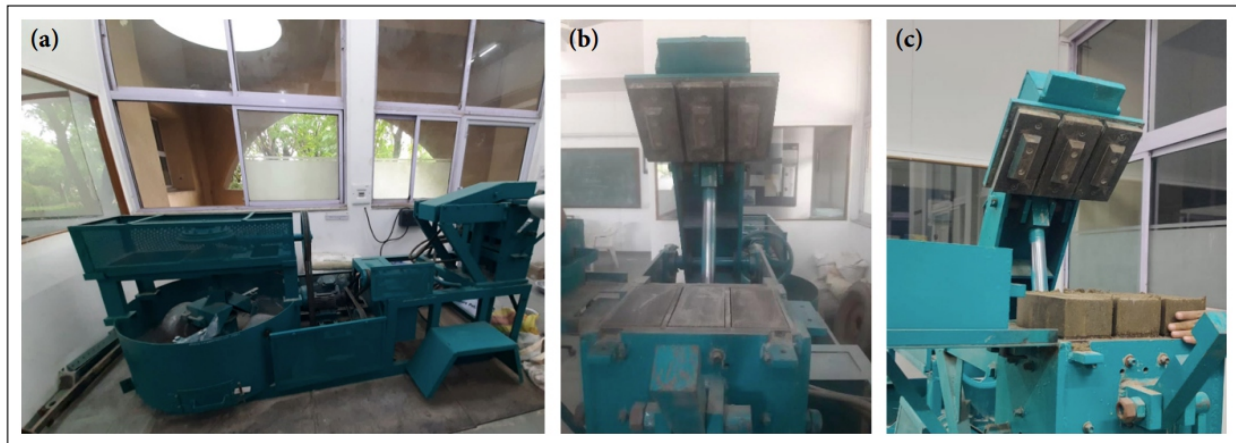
(a) Hydraulic brick-making machine. (a) Hydraulic compressor. (c) Production of brick.
